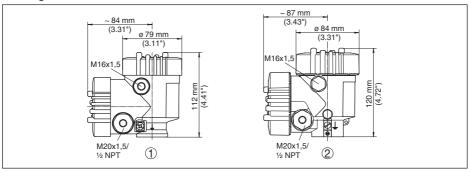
Dimensions of housing - with integrated display and adjustment module the housing is 9 mm/0.35 inches higher
